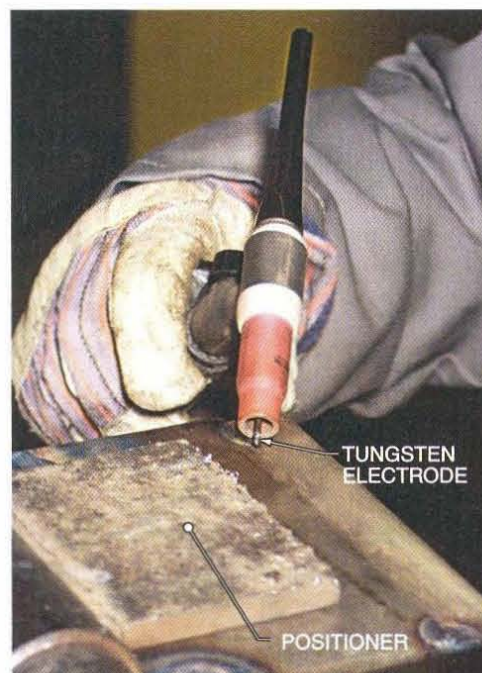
In GTAW, a tungsten electrode is used to provide the arc for welding; it is not consumed in the weld.
